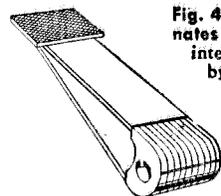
Saves 73%, Eliminates Broaching. Hub with integral key is produced by stacking stampings in assembly. Arm is 10 gauge, brake formed and welded to hub. Cost is only 31¢. Weighs 2.2 pounds.
